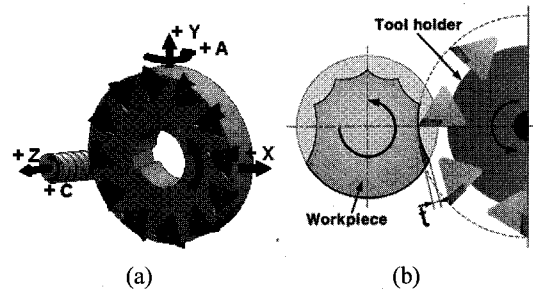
Mechanism of side milling. (a) Three dimensional view, (b) Chip generation mechanism
